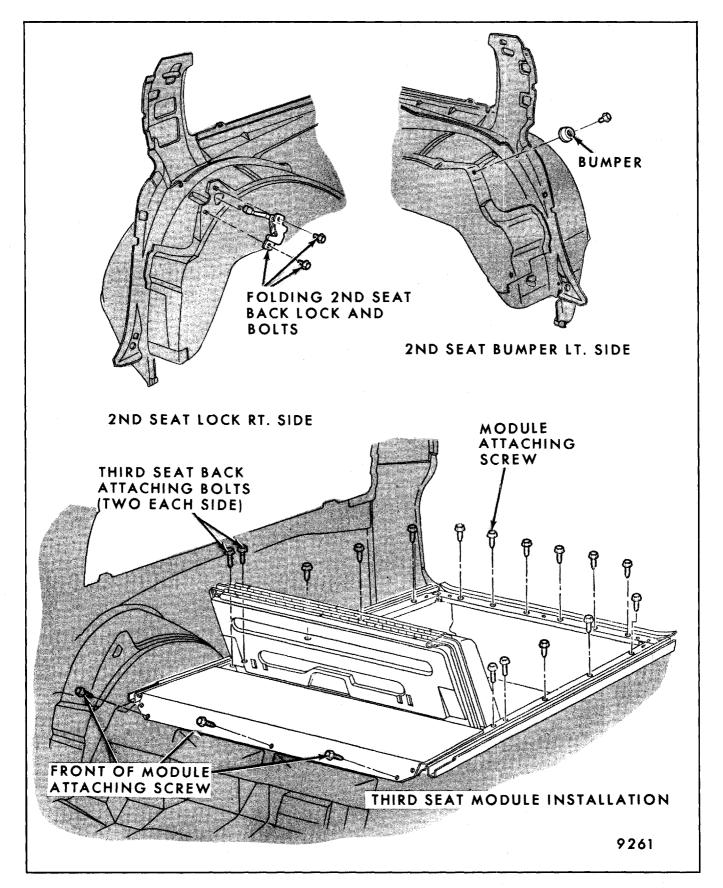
Second Seat Back Lock, Bumper and Third Seat Module Installation - B Styles
